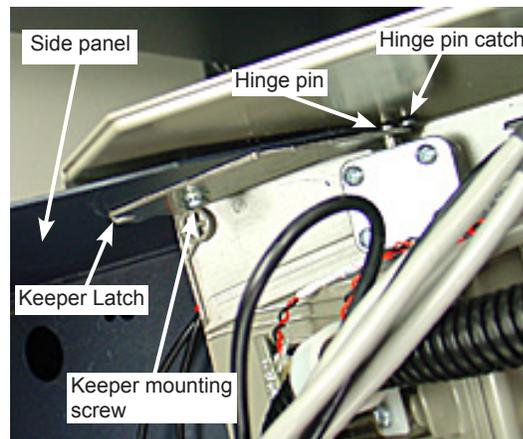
Primary mounting points for the hinge assembly on the X2 control panel
